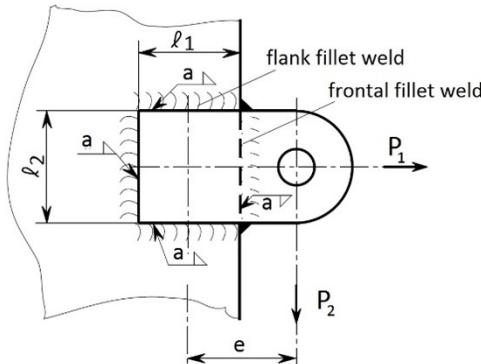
Weld joint of an overlapped lifting eye
